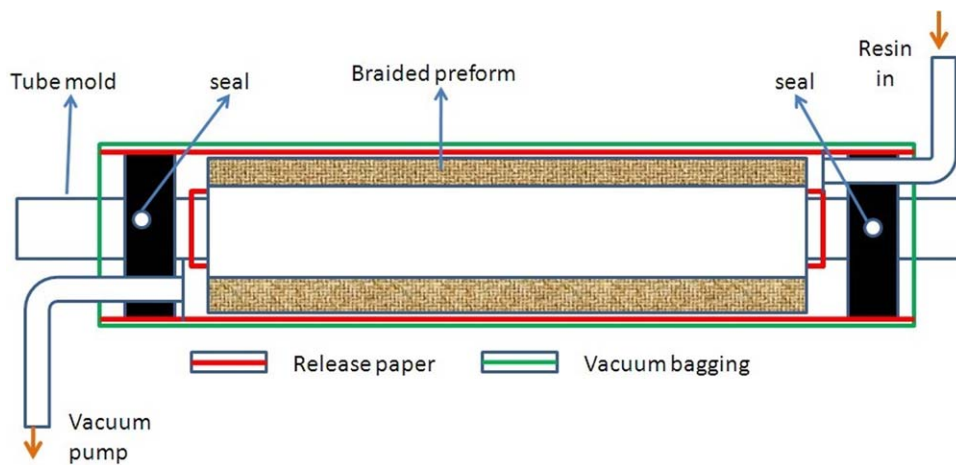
Vacuum resin transfer molding process. [Color figure can be viewed at wileyonlinelibrary.com]
